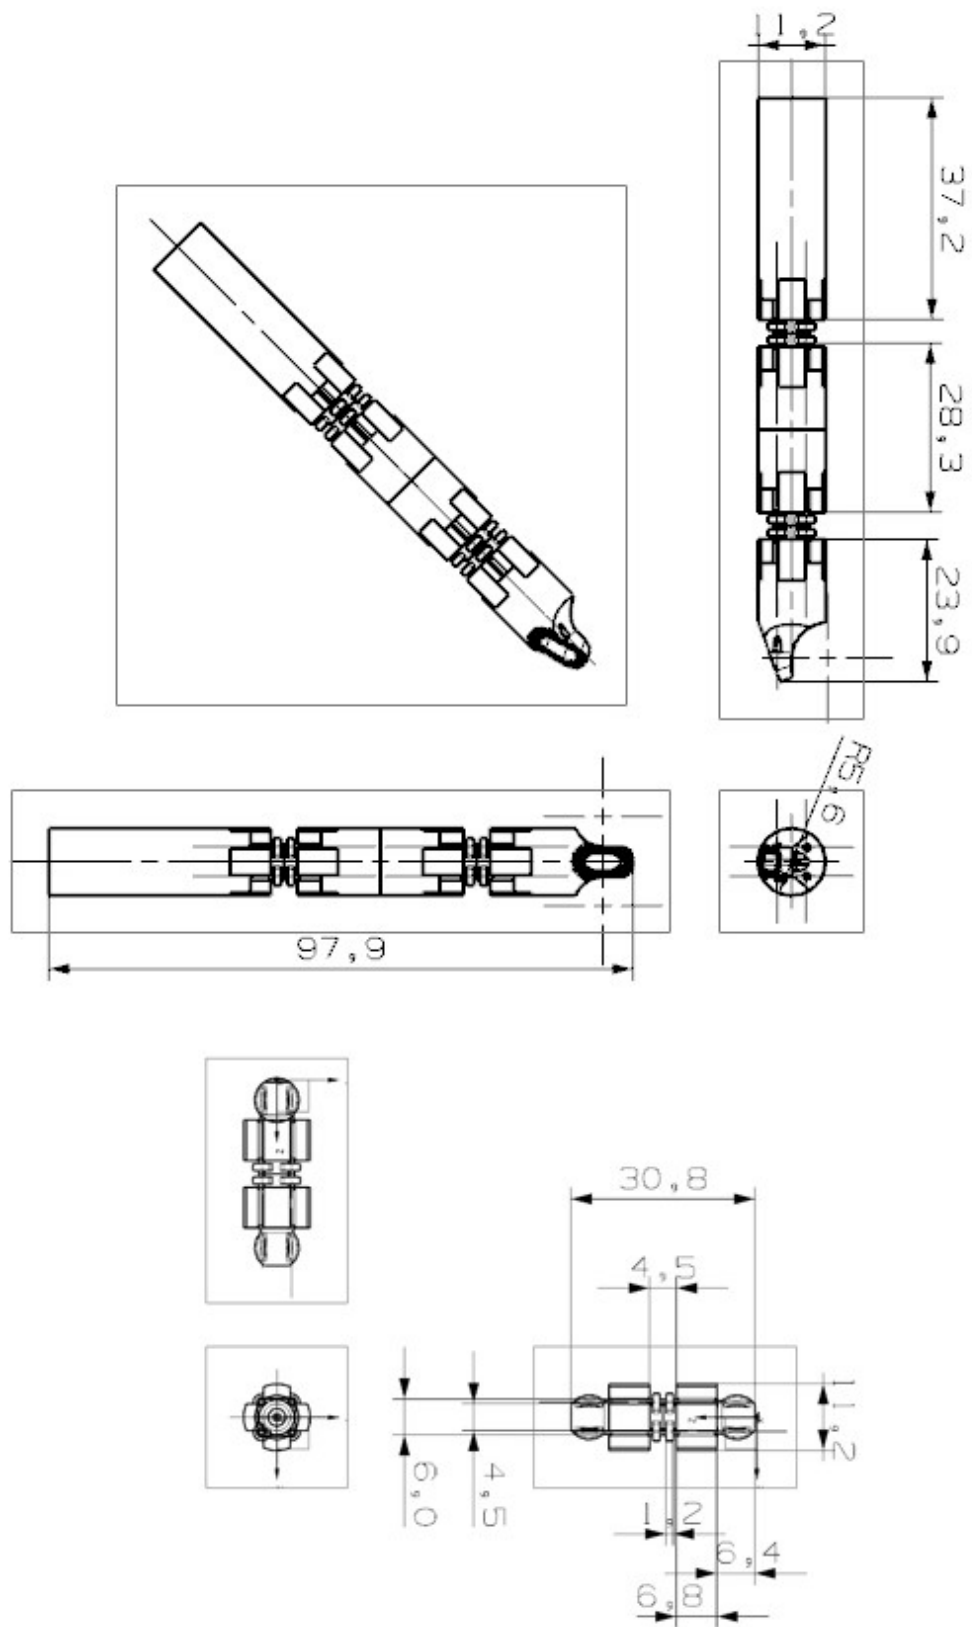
CAD drawings of SMA-driven instrument prototype (assembly and soft joint)
